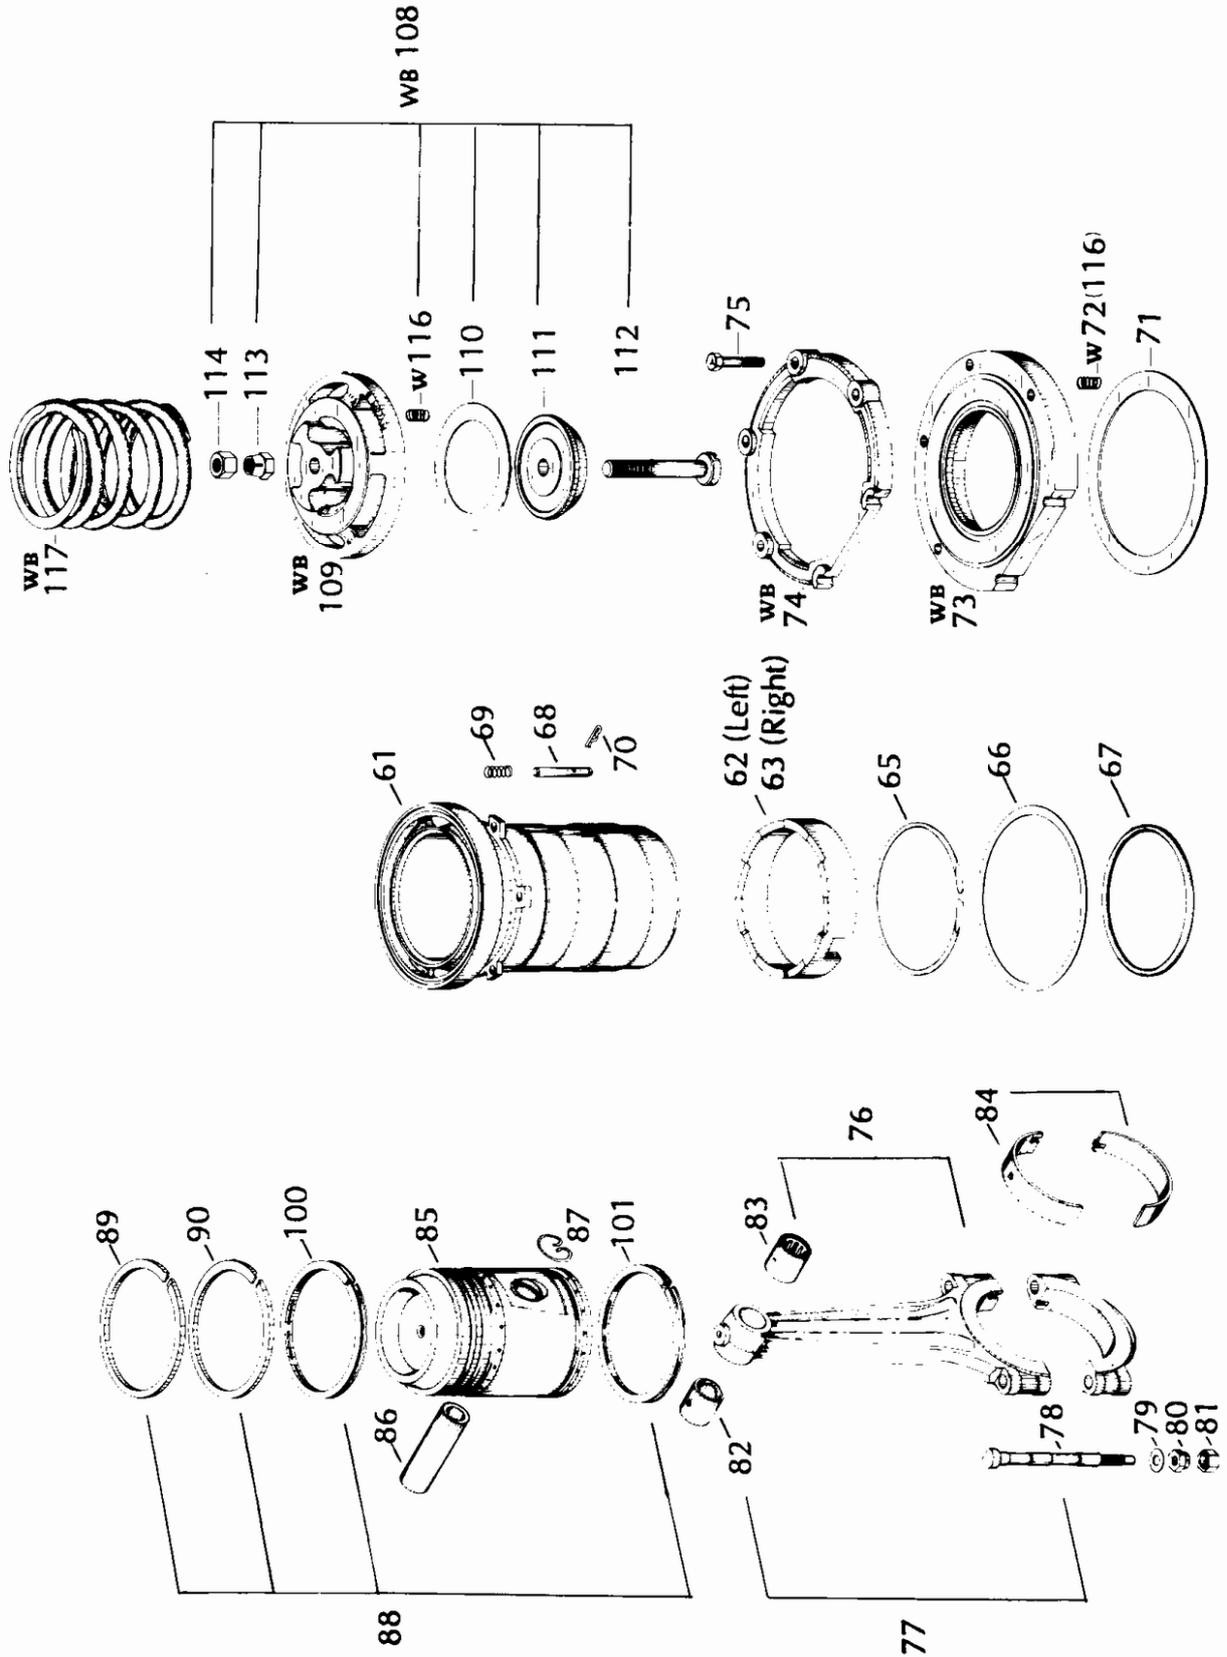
Development View of Parts Around the WB-type Cylinder
